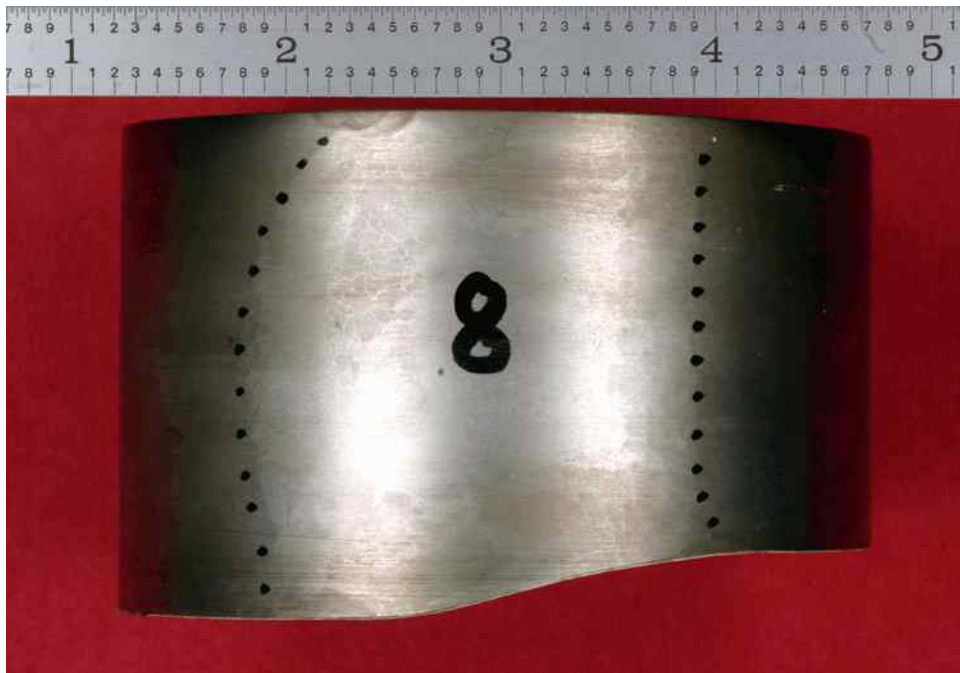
(D71147-08) Core No. 8 (weld metal)
